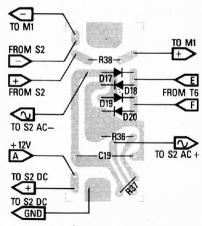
THE PARTS LAYOUT for the meter board is simple, but there are many connections to other circuits; so take extra care with the interconnections.
